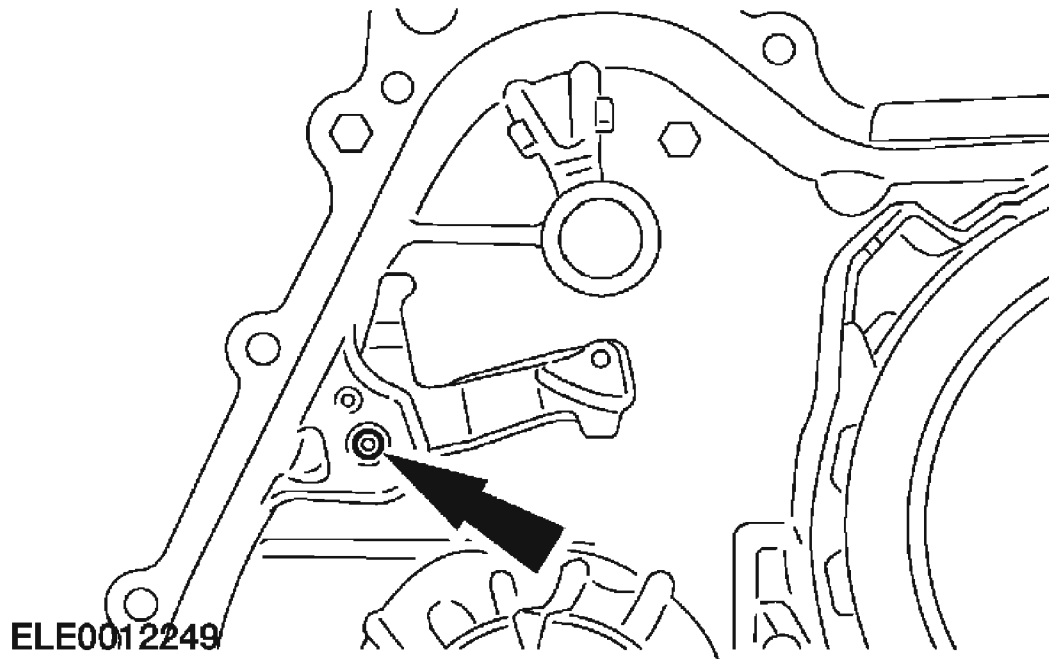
Removing Manual Control Lever Shaft Assembly
